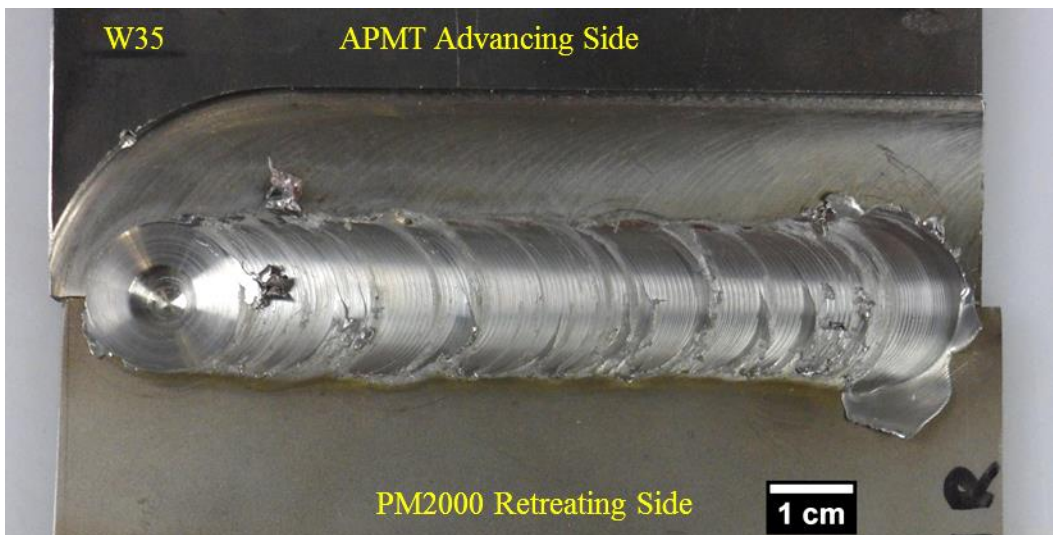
Optical image of the dissimilar metal weld between APMT and PM2000 designated as W35.
